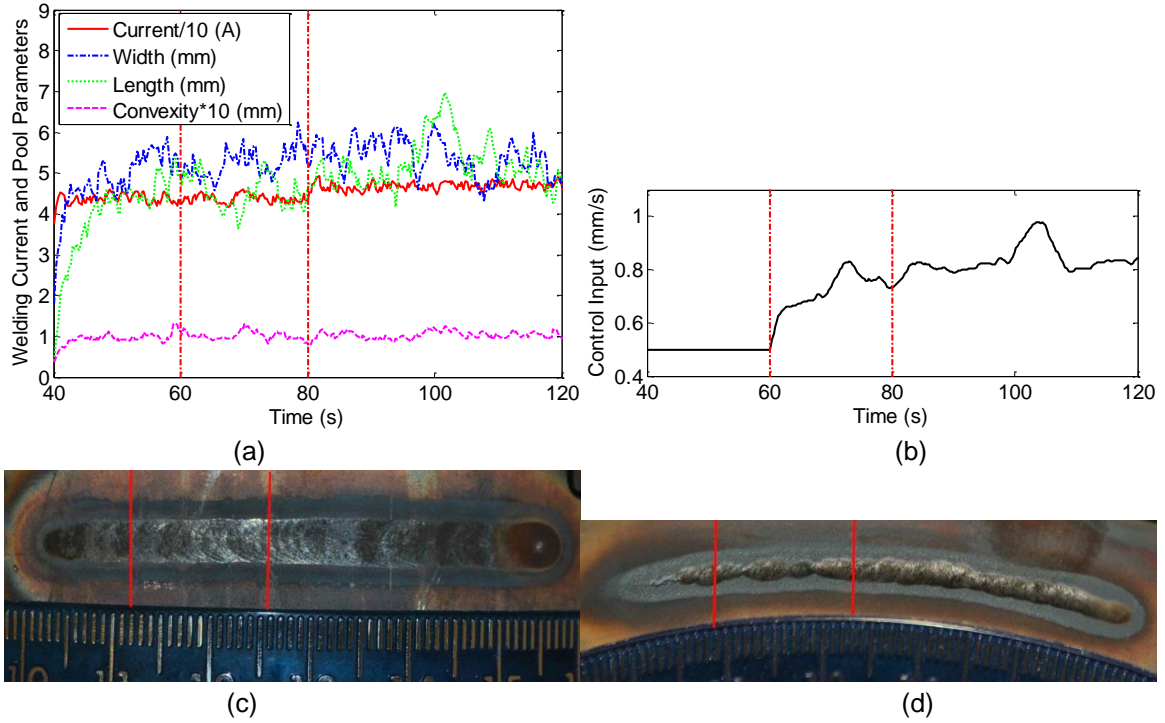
Experiment 1 results (a) Welding current and weld pool parameters (b) Control input (c) Front-side bead (d) Back-side bead.
